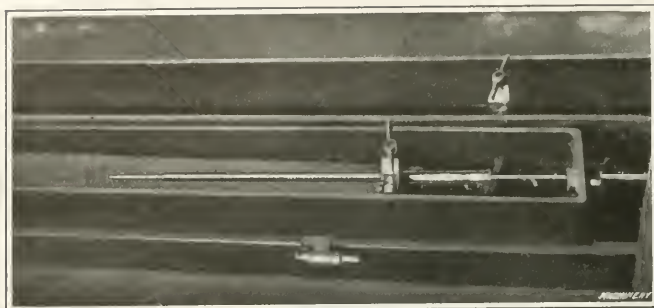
Enlarged View of Reaming Machine shown in Fig. 9
